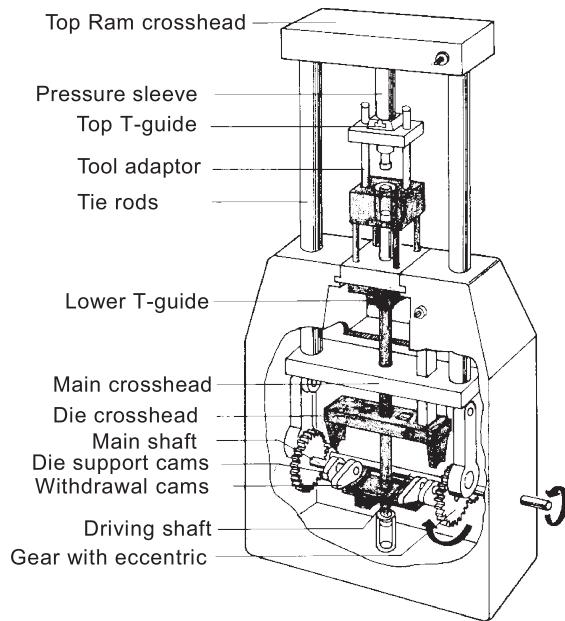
A general view of automatic mechanical press. (Courtesy: Dorst Maschinen und Anlagenbau).
